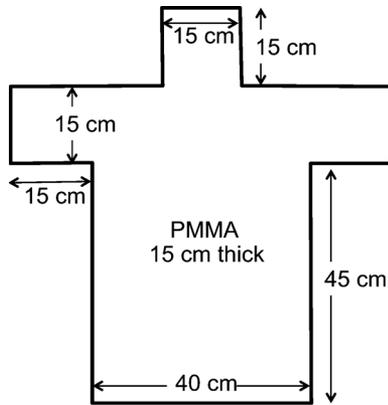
Torso phantom shape and dimensions specified in the draft backpack standard N42.53.
